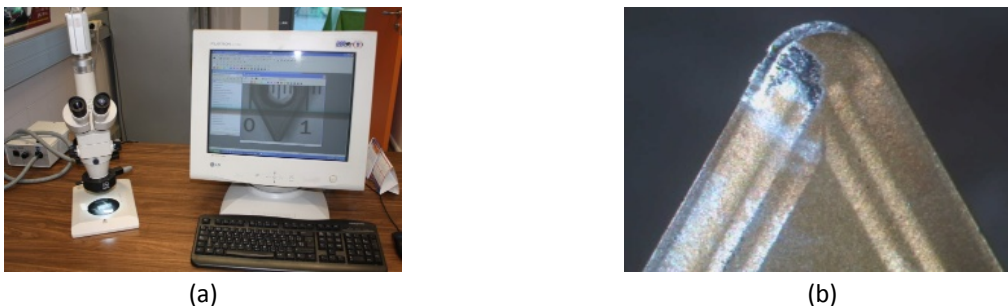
(a) SOM equipment setup and (b) SOM image of tool tested.
